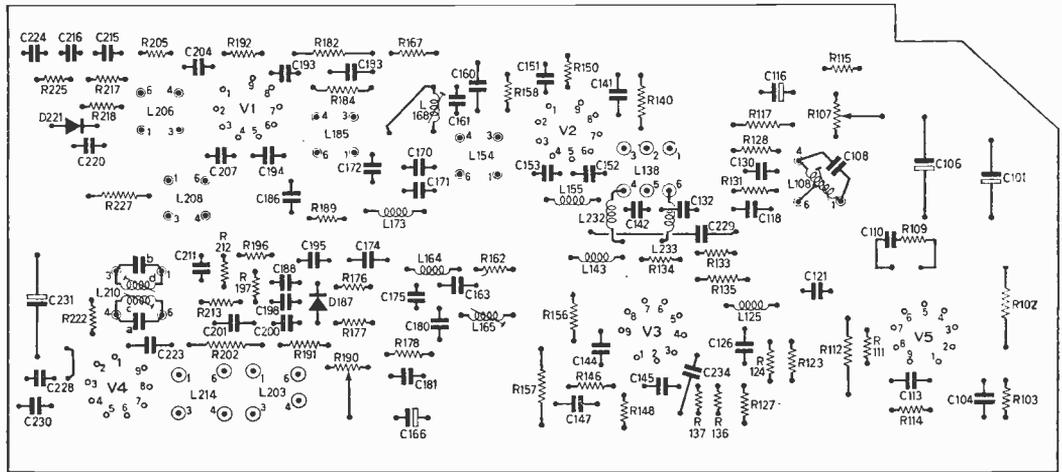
Layout of the receiver printed panel, viewed from the component side.
